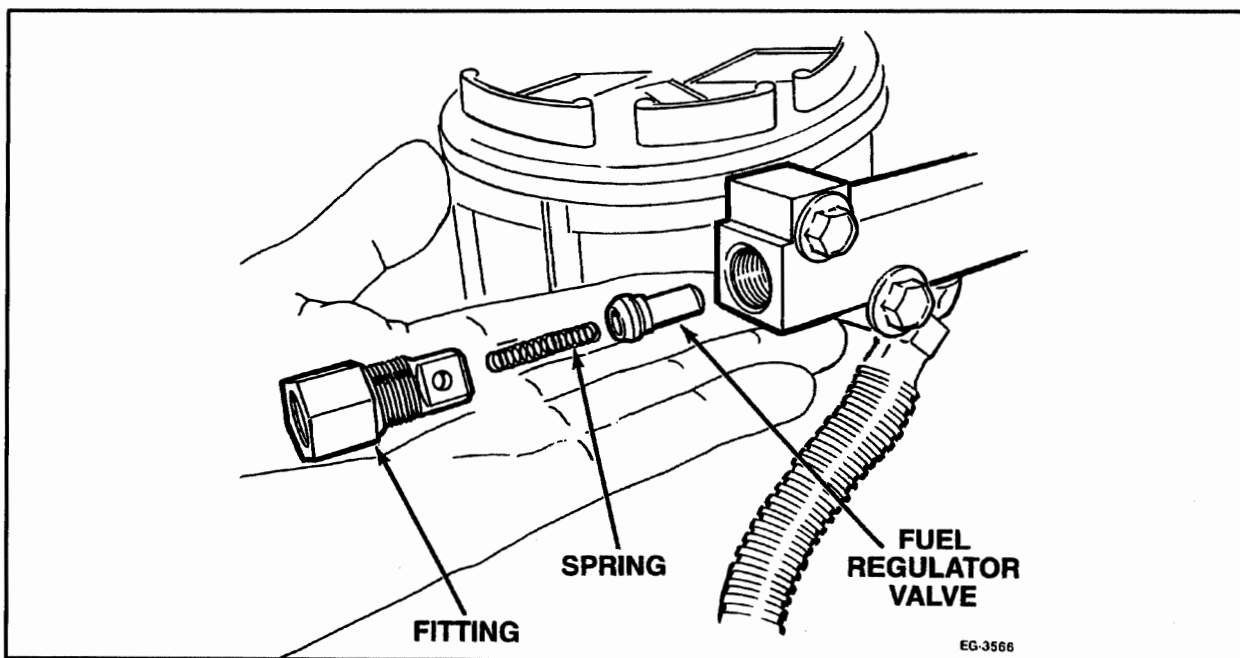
Fuel Regulator Valve Removal and Inspection
